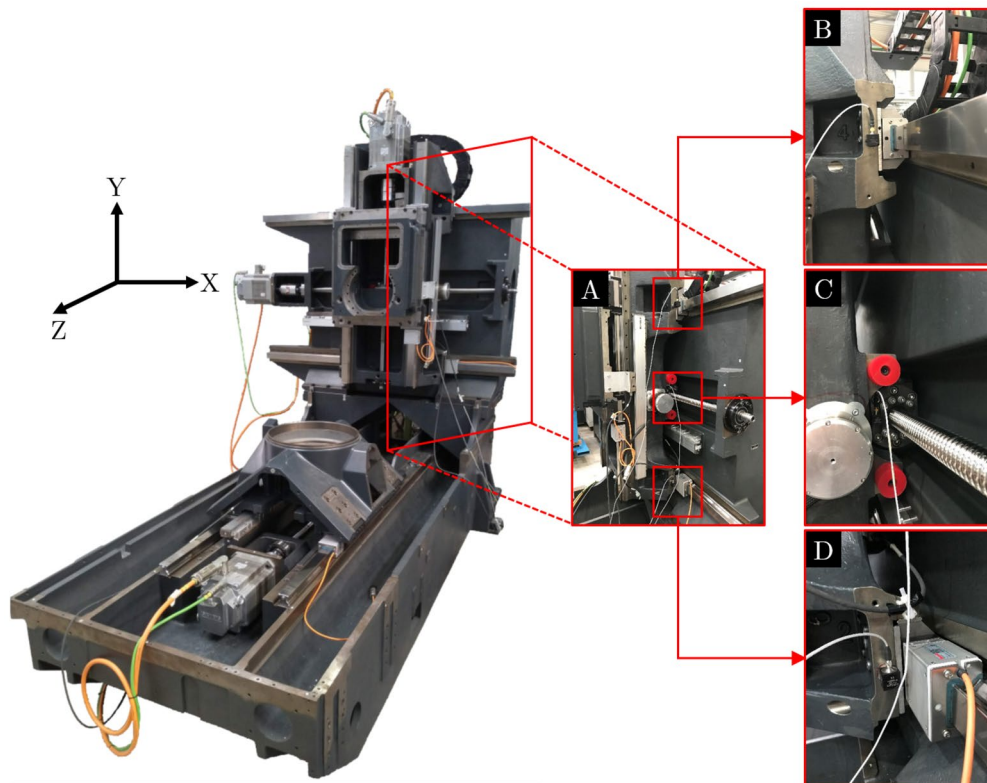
Experimental setup. On the left hand side the investigated DMG DMC duo Block 55H is shown. A shows a side-view of the investigated machine's X-axis including the three Kistler accelerometers placed at the upper LGS (B), the BSD nut (C) and the lower LGS (D)
